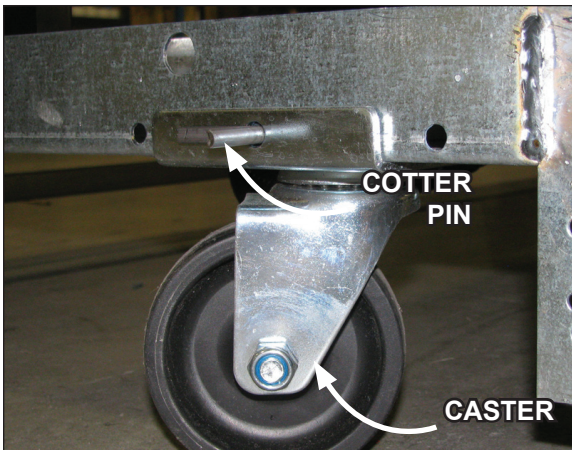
Removing the casters is an easy process. Simply flatten and remove the cotter pins that are holding the casters in place. Then lift the case with a "J" bar and slide the caster assemblies out. The dismantled casters can now be discarded.
